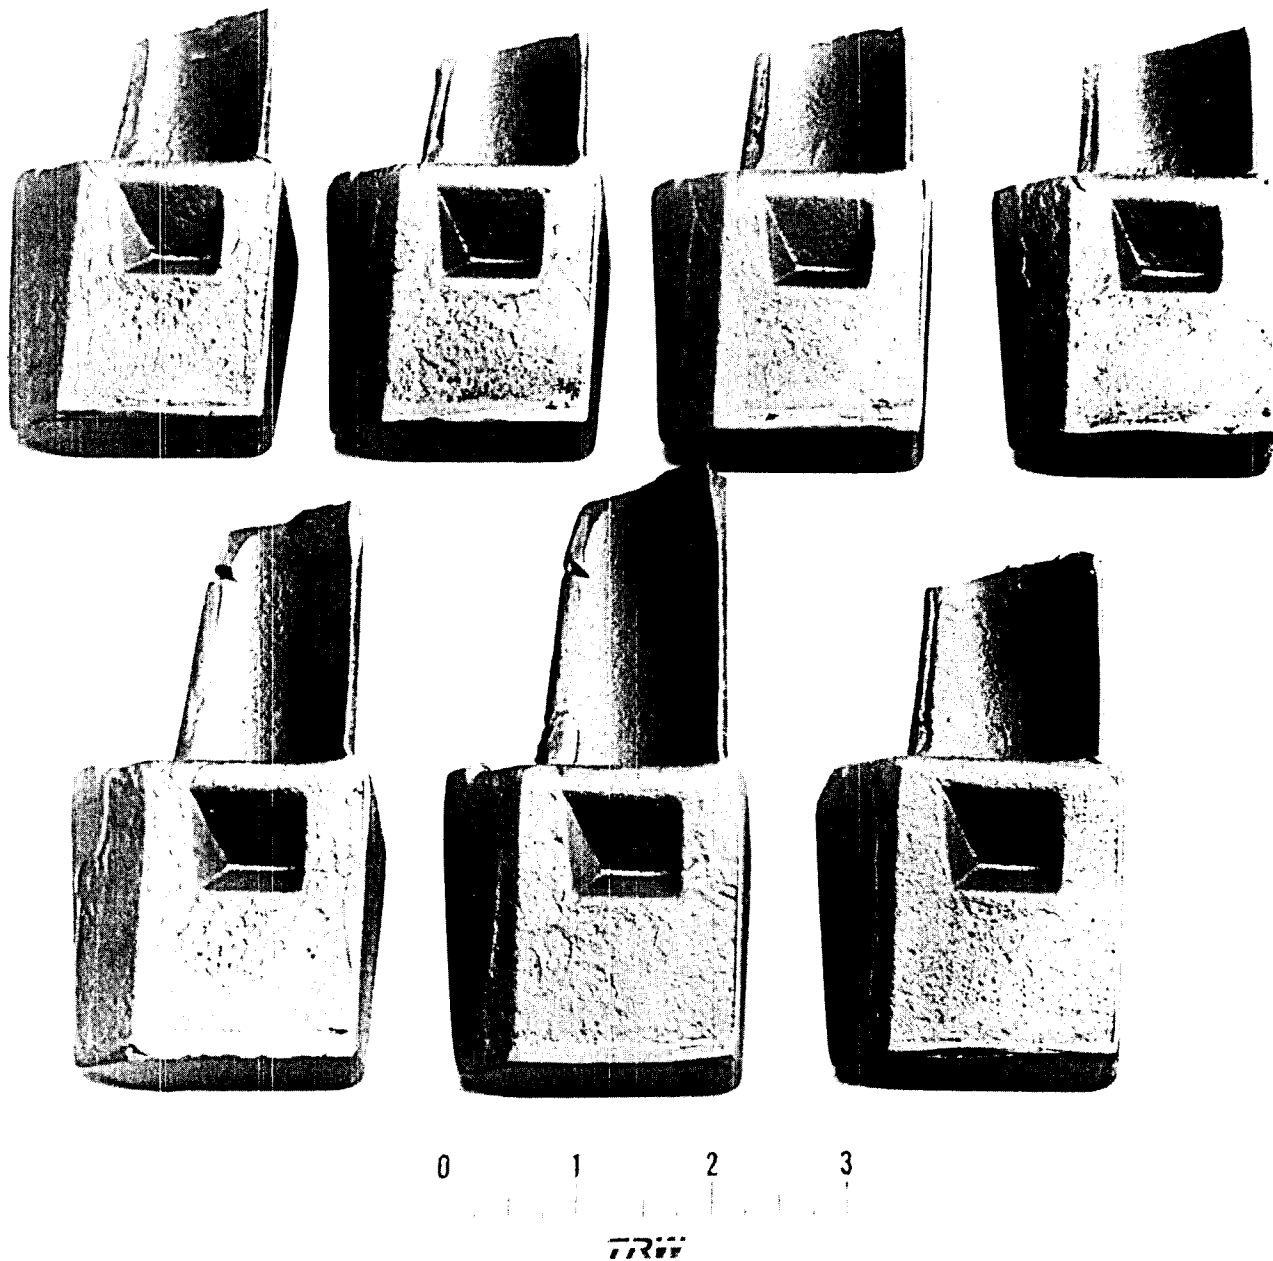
Examples of Finish Forged MA-6000 Blades with Can Intact - Second Forge Campaign.
